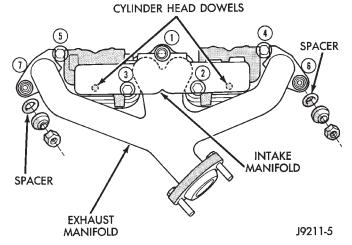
Intake/Engine Exhaust Manifold Installation (2.5L Engine)
